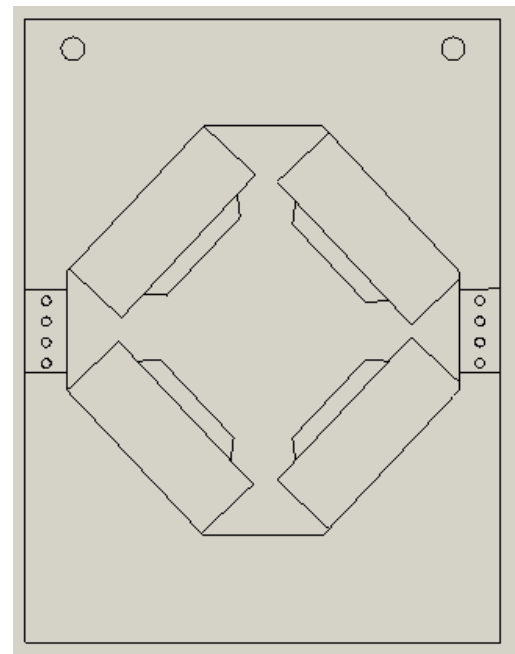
(2D drawing for the Quadroppol extracted from Solidworks)
